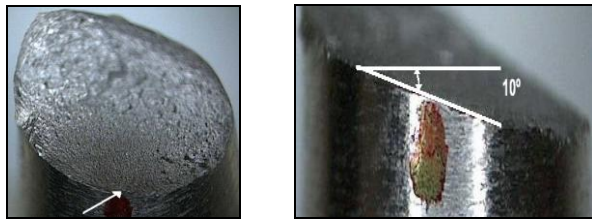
Fractographic analysis of the fatigue failure plane orientation under EB loading path shown in Table 3.
